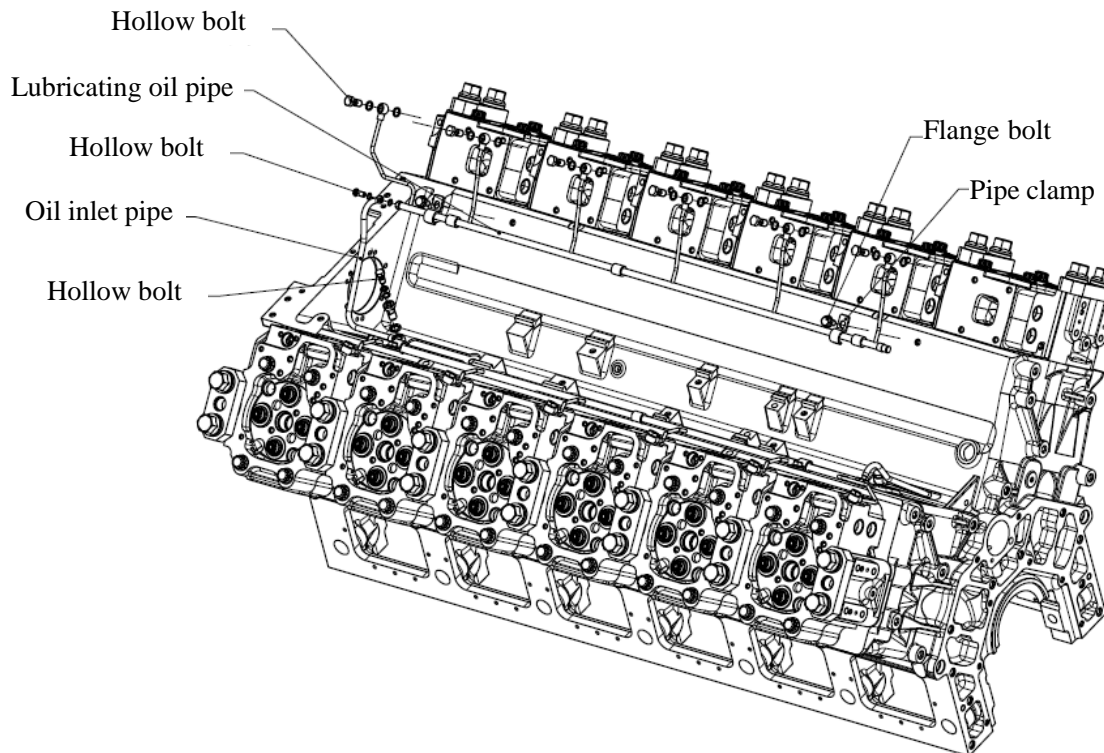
Assembling of cylinder head lubricating oil pipes
